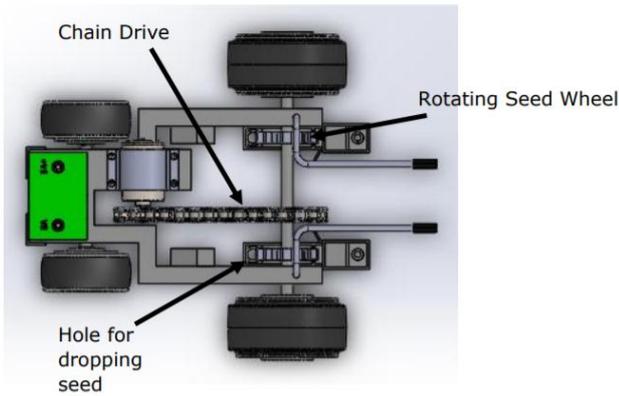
SEED SOWING MACHINE MODEL VIEW 2
